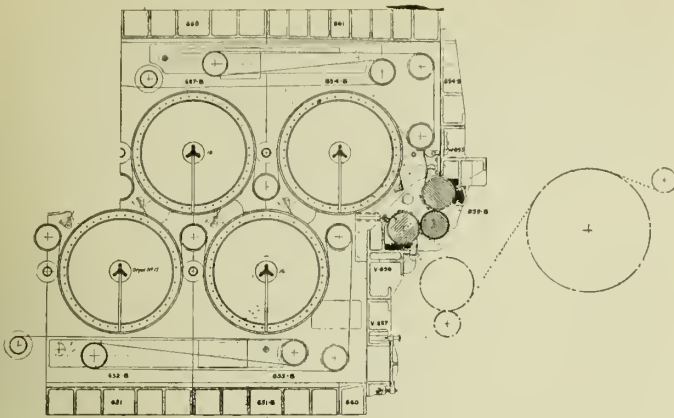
Vacuum Dryer, Type 20-60-152, Cross-section showing General Arrangement of Outgoing Seal.
